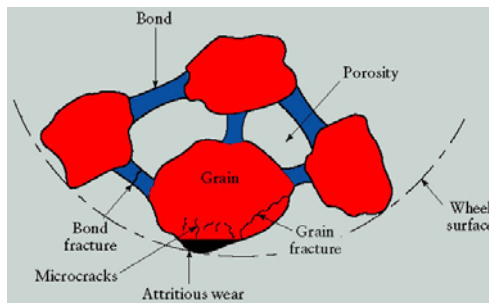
(Kalpakjian) Schematic illustration of a physical model of a grinding wheel, showing its structure and wear and fracture patterns.
